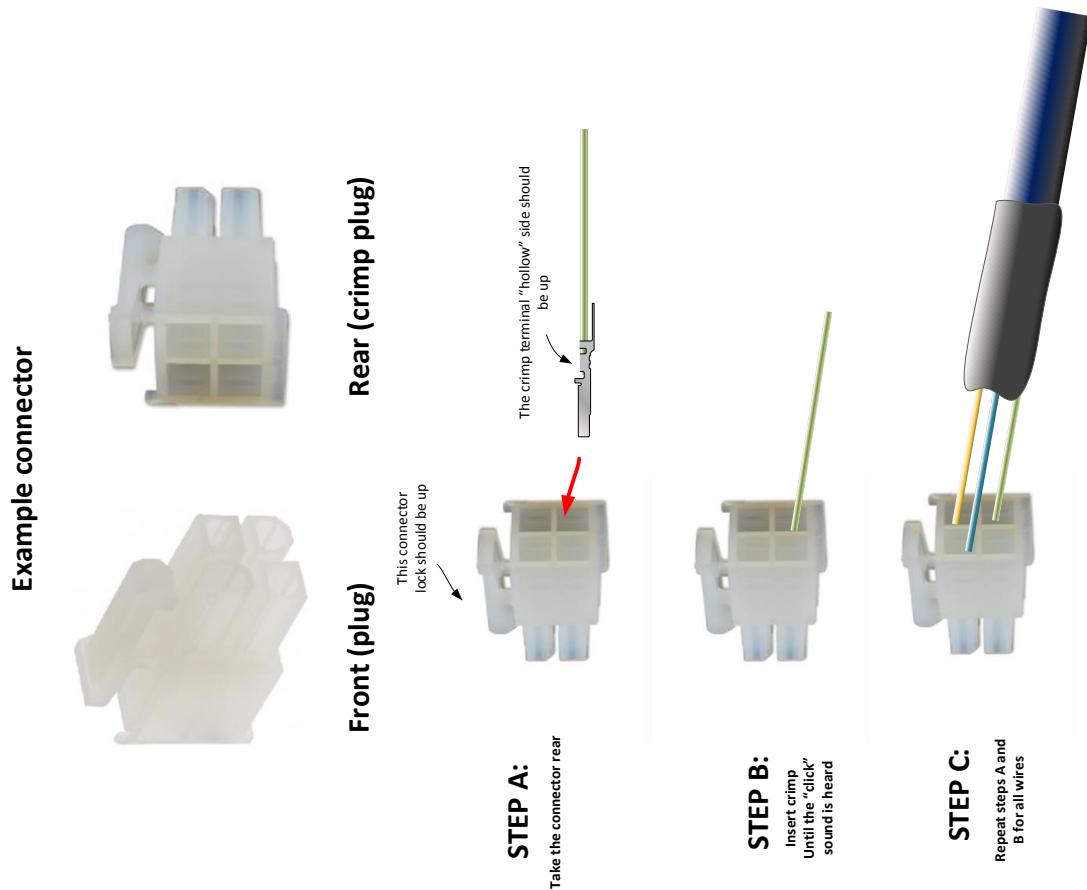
Crimping Molex Mini-Fit®: inserting the crimp terminals into the connector holes
